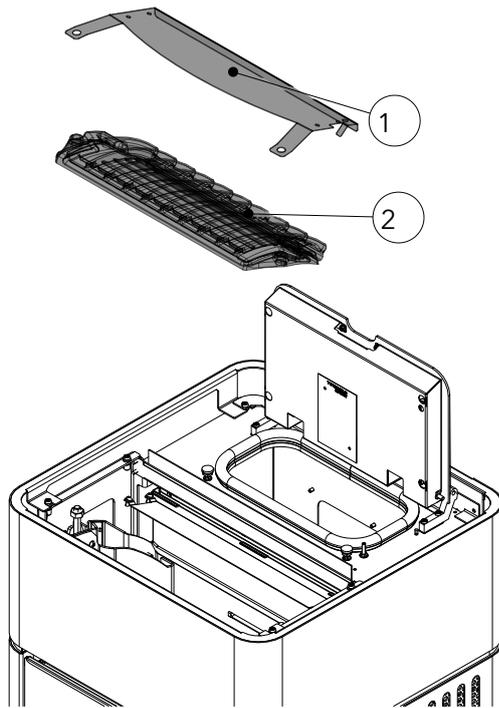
Removing sheet metal heat deflector and cast iron top plate
